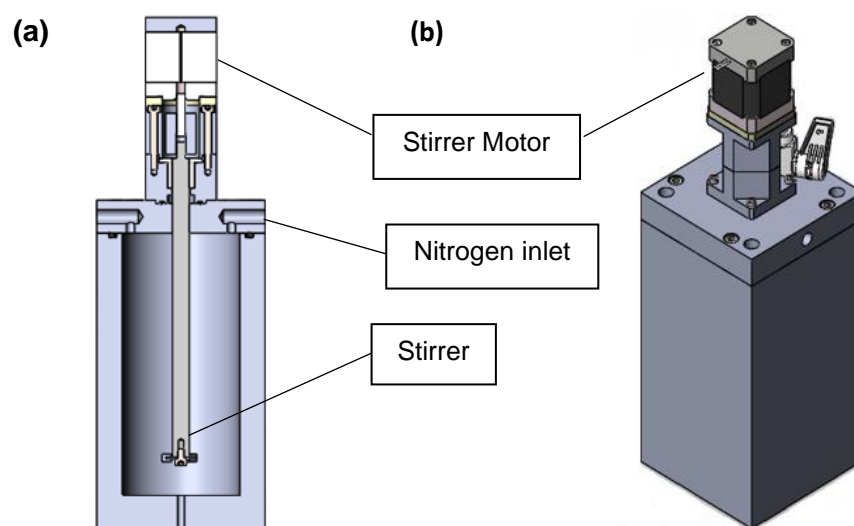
Isometric view (a) and sectional view (b) of a tank.
